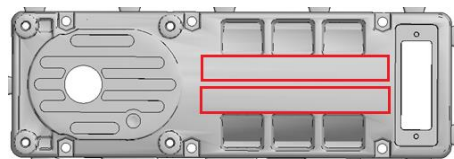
Geometry of the casting manufactured during the experimental campaign with evidenced the zones for tensile test.
